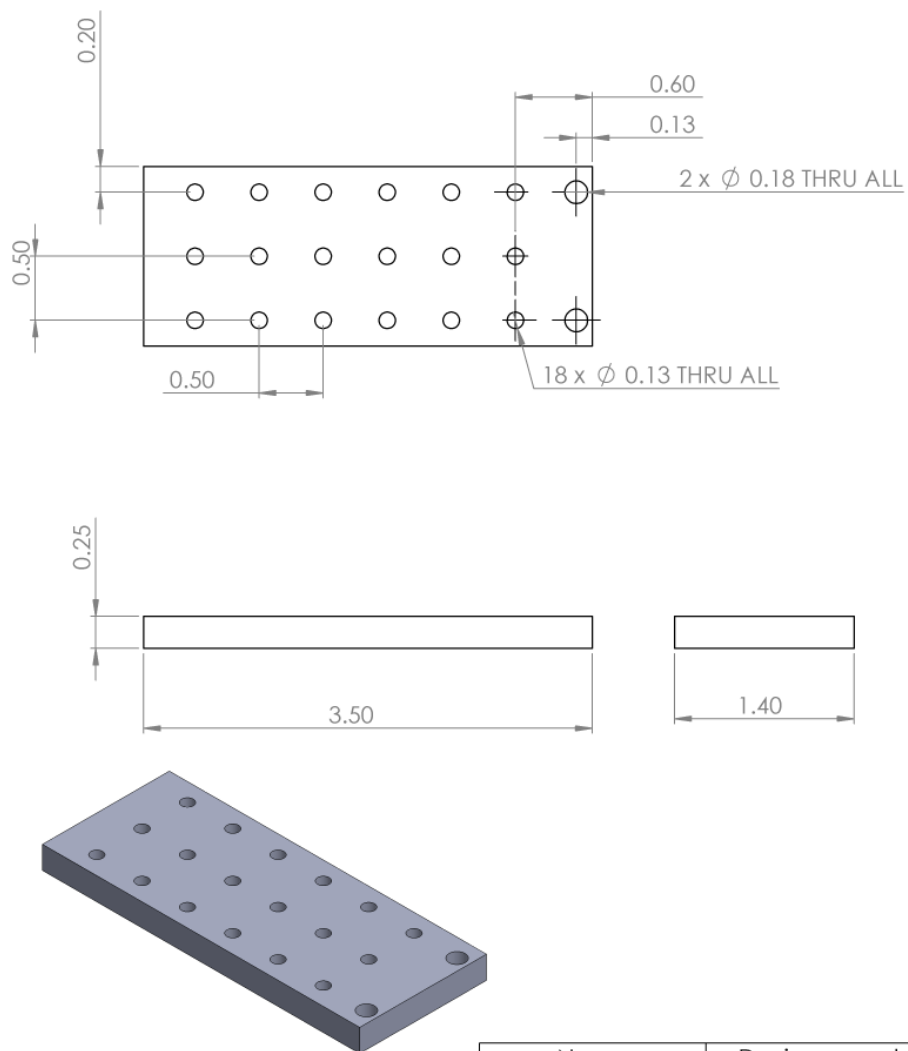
Second generation device cell top. This part was machined out of OFHC copper. The gold plated. Afterwards a 1/8" VCR was silver soldered into the opening.
